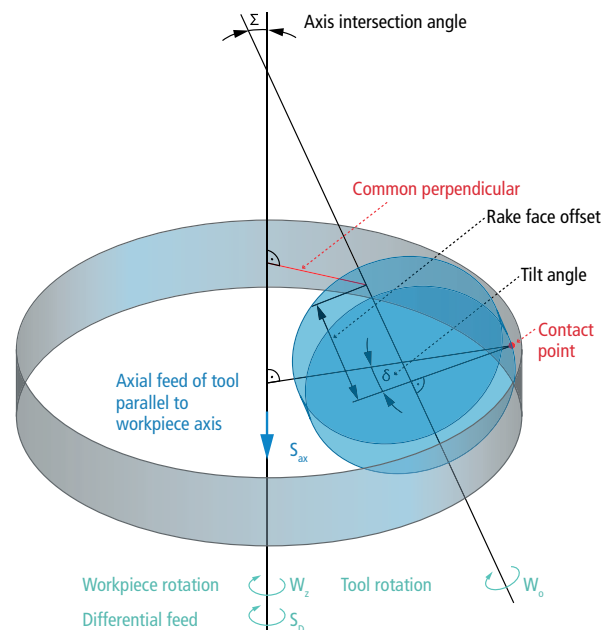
Kinematics of the skiving process: The intersecting axis arrangement is achieved by a tilting around the distance of closest approach and base points of the perpendicular of the axes of tool and workpiece.
